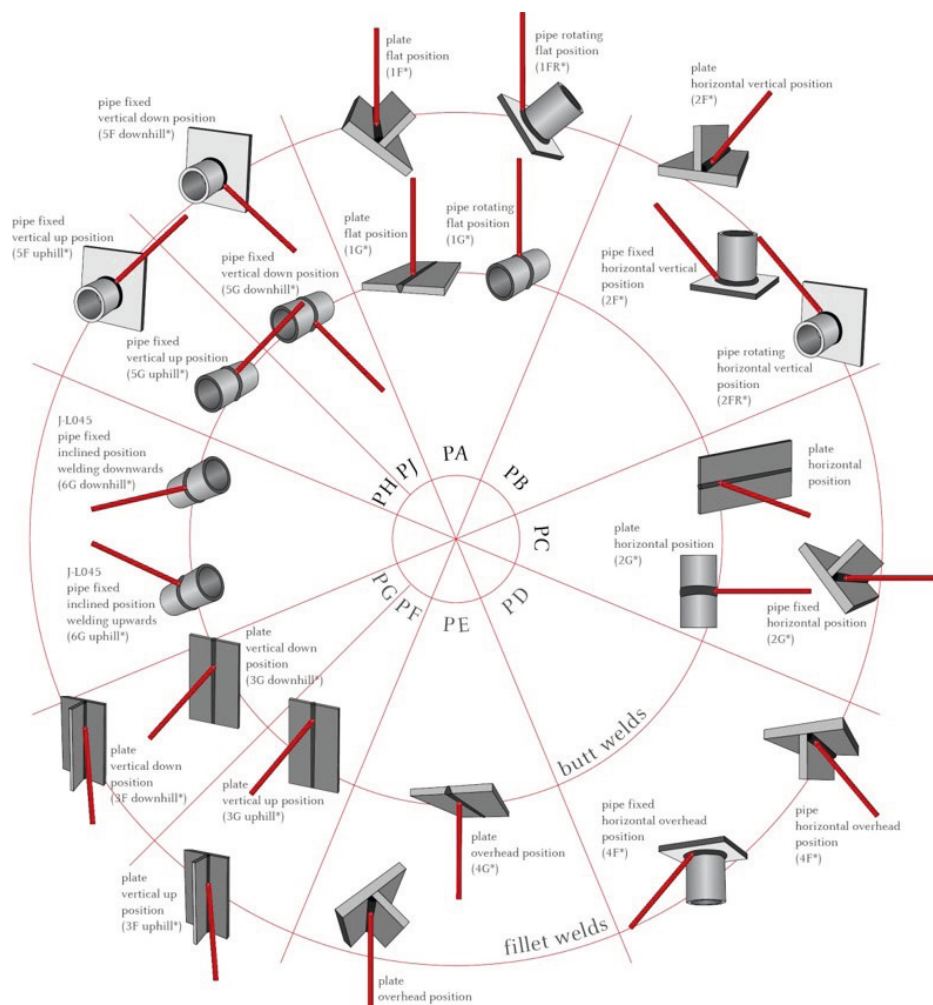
Welding positions in accordance with DIN EN ISO 6947.
